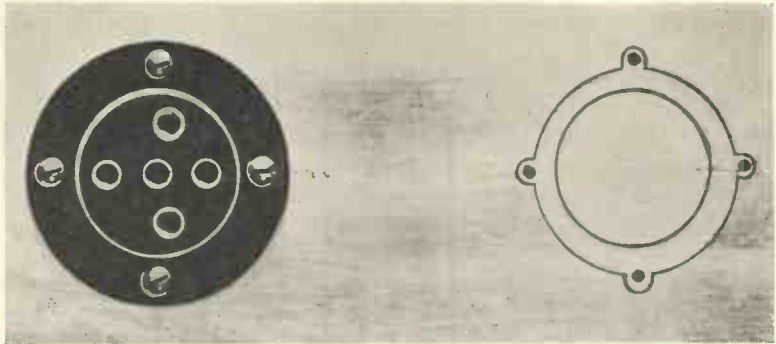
A CLIX CHASSIS-MOUNTING VALVE HOLDER.
